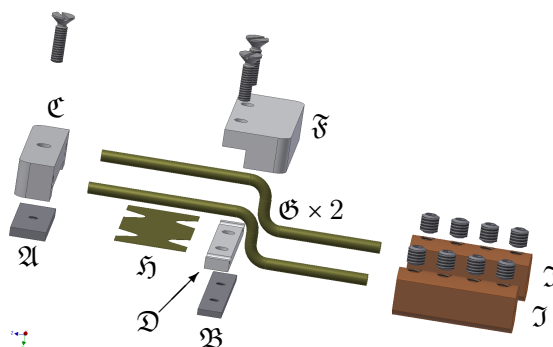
Assembly of the Hot Plate — Three screws and two threaded plates (A, B) clamp three isolation pieces (C, D, E) machined from Macor^{®a} onto the main part (not shown). The isolation holds two tantalum electrodes^b (G) with a spot-welded tantalum sheet^c (F) in this version. Four barrel connectors (H, only two shown) and copper wire^d (not shown) isolated with glass fiber sleeves^e (not shown) establish the electrical connection to a power/thermocouple feedthrough^f (not shown). A thermocouple^g is spot-welded to the hot plate (J) and connected to two terminals (not shown, see Figure 2.39). Kapton[®] isolated thermocouple wire^h (not shown) is used to reach the feedthrough from the terminals.
